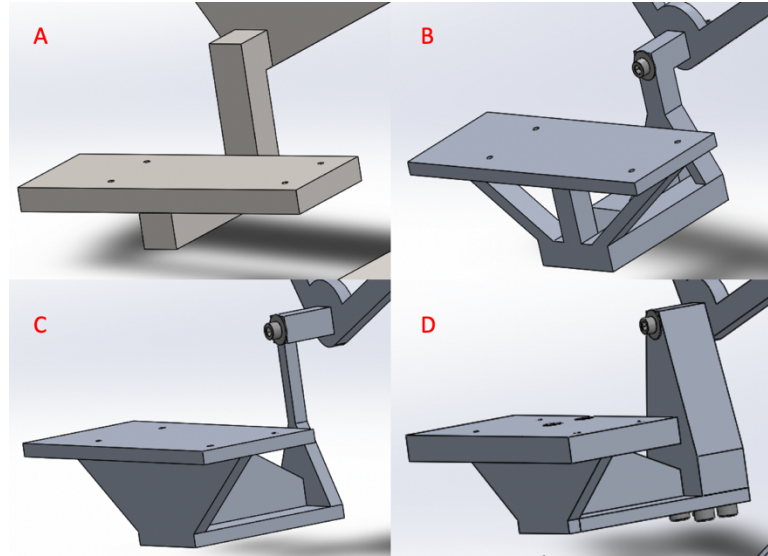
Images of the A) first adapter, B) second adapter, C) third adapter, and D) final adapter designs.
